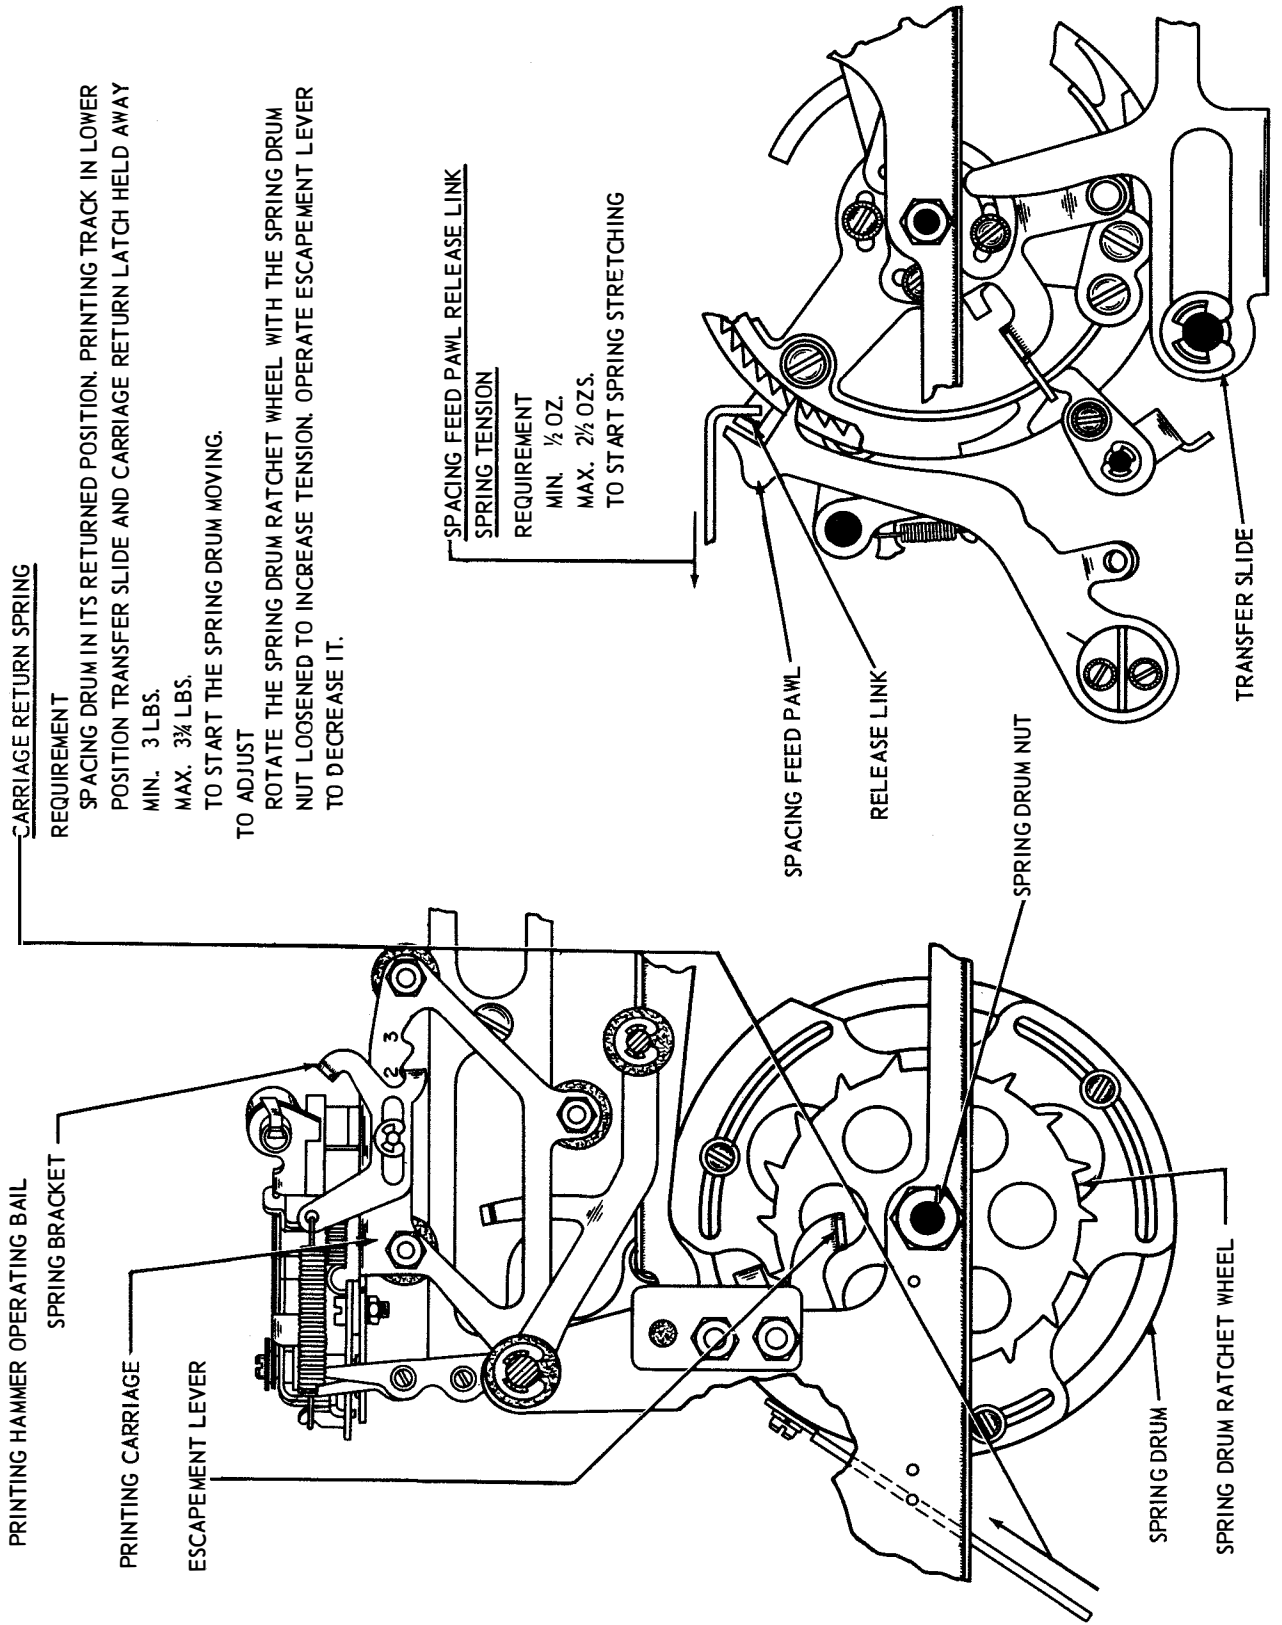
TYPWR, CARRIAGE RETURN MECHANISM
